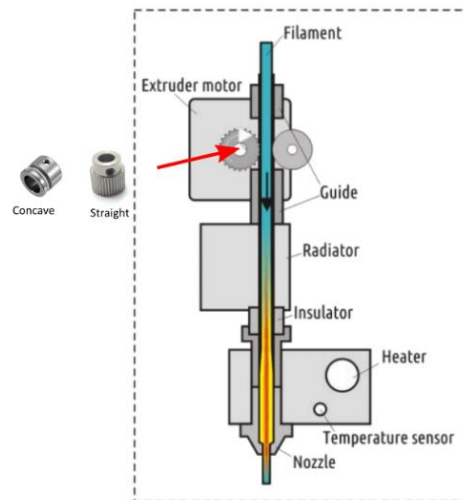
Direct extrusion set-up with extruder motor, radiator and nozzle/heater set-up [202].
